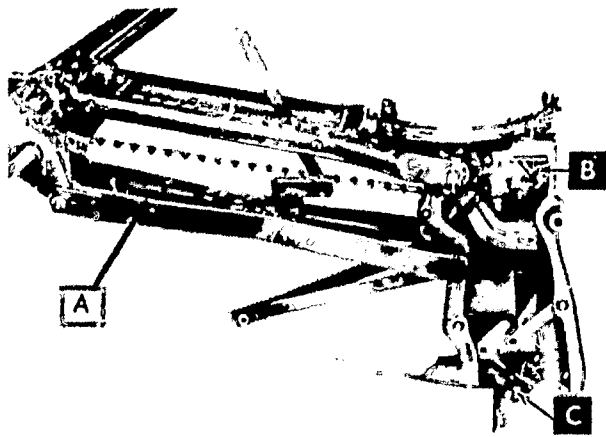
The seeds that have dropped from the planting chamber through the hole in the hopper bottom plate are retained in upper valve B. The valves are tripped simultaneously by pull rod A. The lower valve C catches the seeds released by upper valve B.
